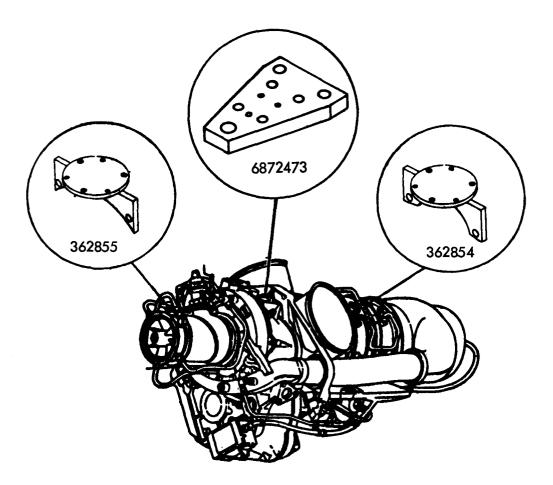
Location of Vibration Transducer Brackets, T-63-A-5A/A700 Engine Page 1-15. Figure 1-16 is superseded. Page 1-16. Figure 1-17 is superseded. Page 2-18. Figure 2-18 is added.
